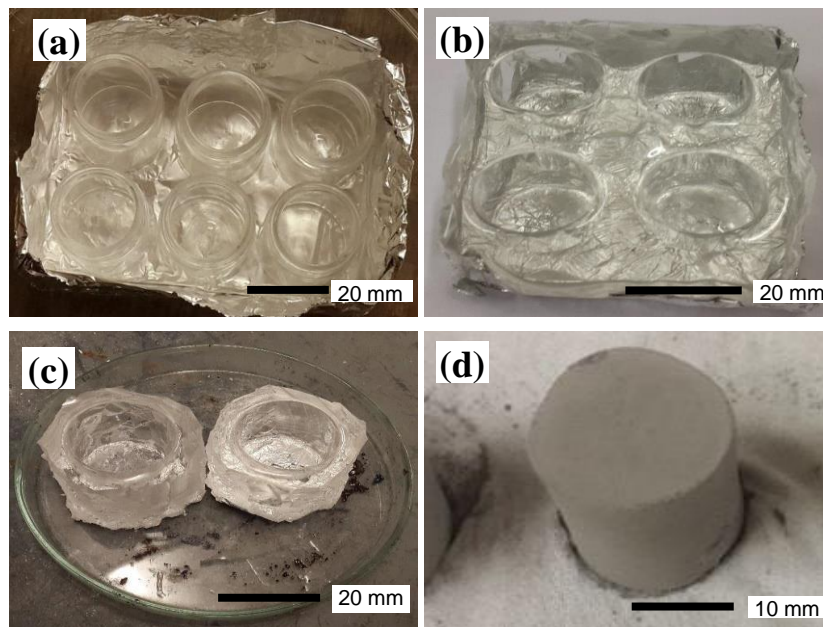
(a) master mould, (b) soft moulds, (c) soft mould ready for CIP, (d) CIPed sample.
